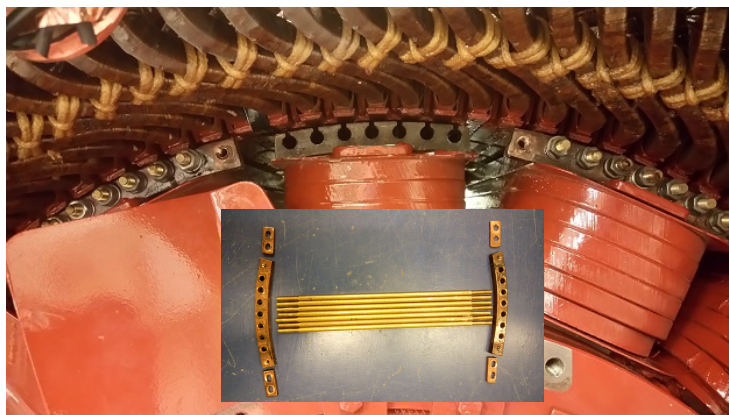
Removed damper bars, end rings and the interpole connection segments from one rotor pole
